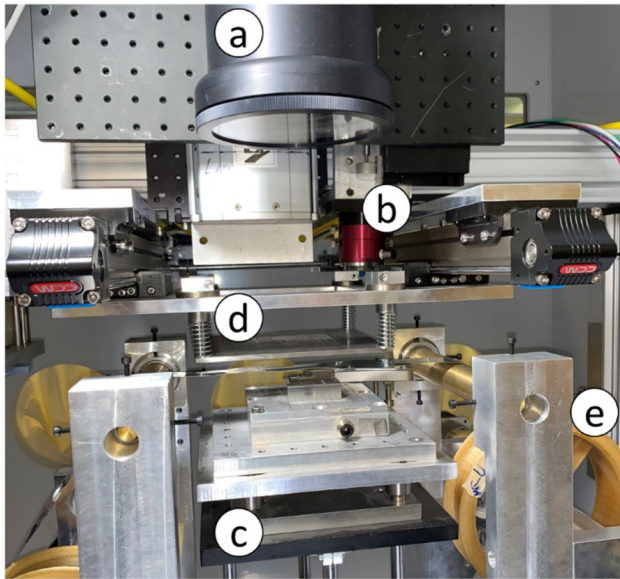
Photo of the in-house developed automated LFP system. (a) Laser scanner, (b) laser cutting head, (c) gantry subsystem, (d) foil clamping plate, (e) roller-to-roller foil supply mechanism
